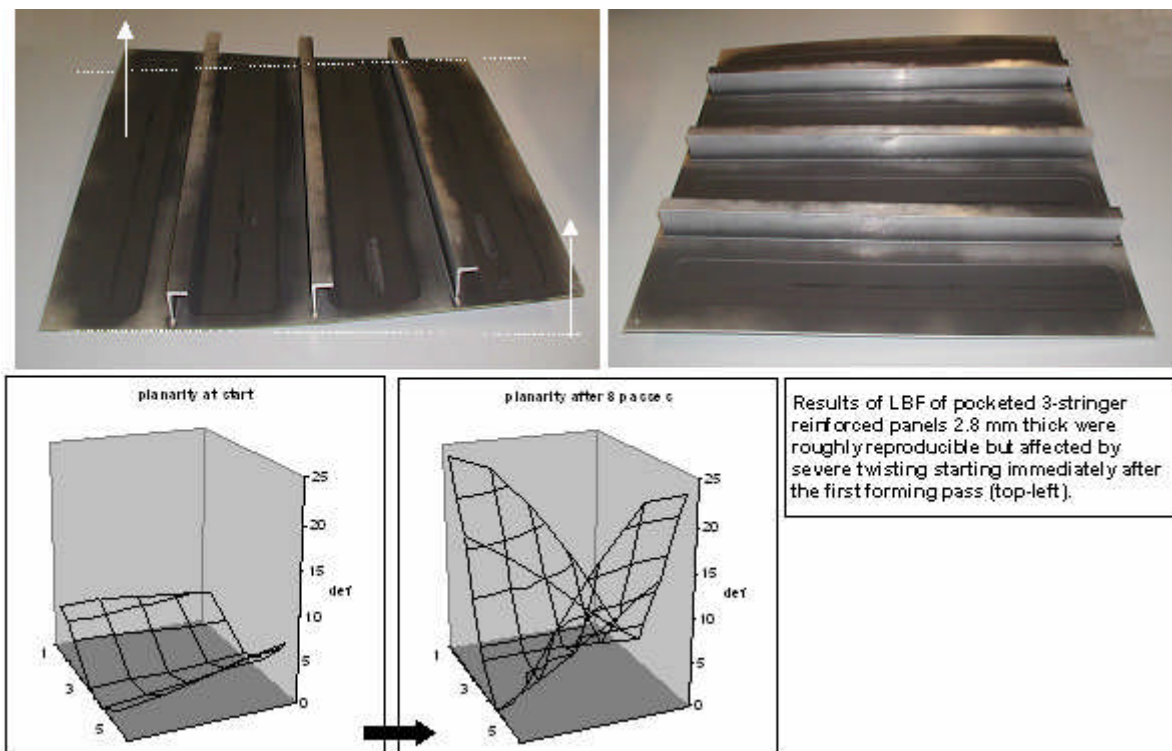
Twisting after LBF (e. g. with CO₂ laser) on panels having pockets and welded stiffeners (RTM forming of ALA fabricated integral panels)
